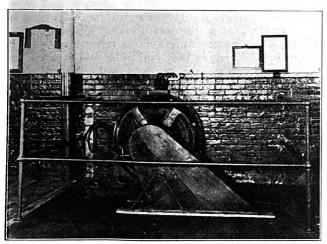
One of the Motors Connected to Drive a Group of Machines Through Silent-Chain Belt Drive.
